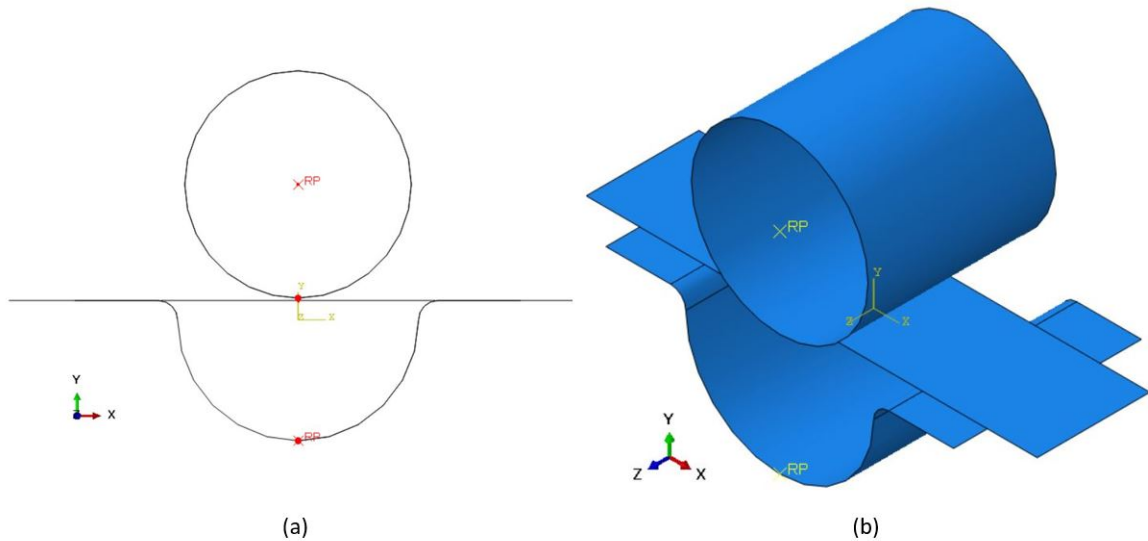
Tool, die, and sheet assembly at start of simulation (a) Front view, (b) Isometric view
